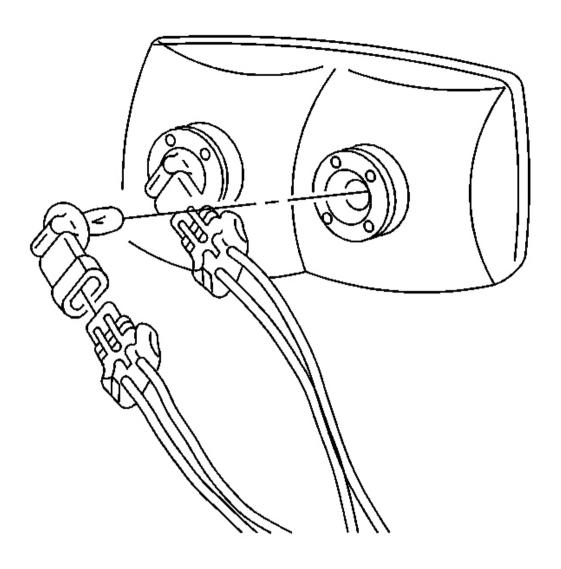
Electrical Connector To Headlamp Bulb/Socket Courtesy of GENERAL MOTORS CORP.
